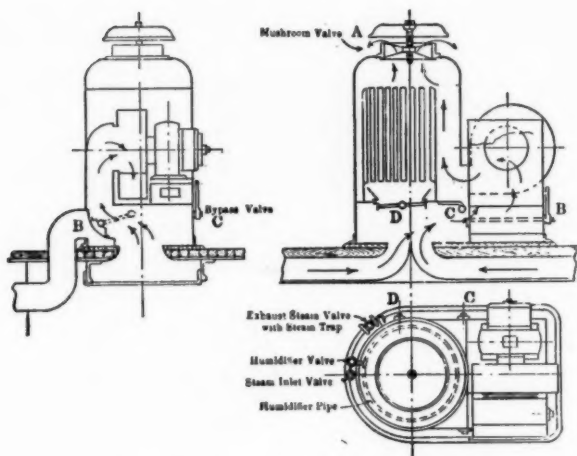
BOTTOM-SUCTION DECK-TYPE THERMOTANK EXHAUSTING AIR
